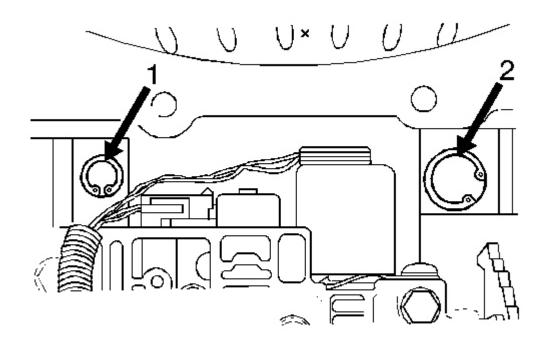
View Of Valve Bore Plug Retainer Ring & Reverse Boost Valve Bushing Retainer Ring Courtesy of GENERAL MOTORS CORP.
